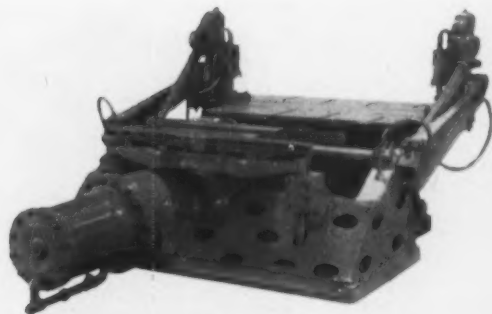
Opposite side of machine illustrated in Fig. 7 shows mold draw and table rollover mechanism.
